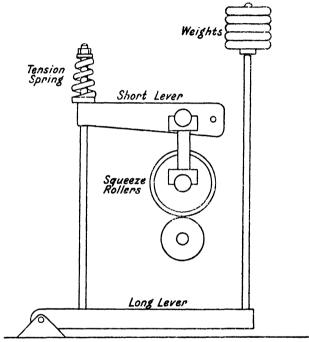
Squeeze Rollers. These rollers have a system of leverage and pressure weights to enable a thorough squeeze to be given to the wool.
